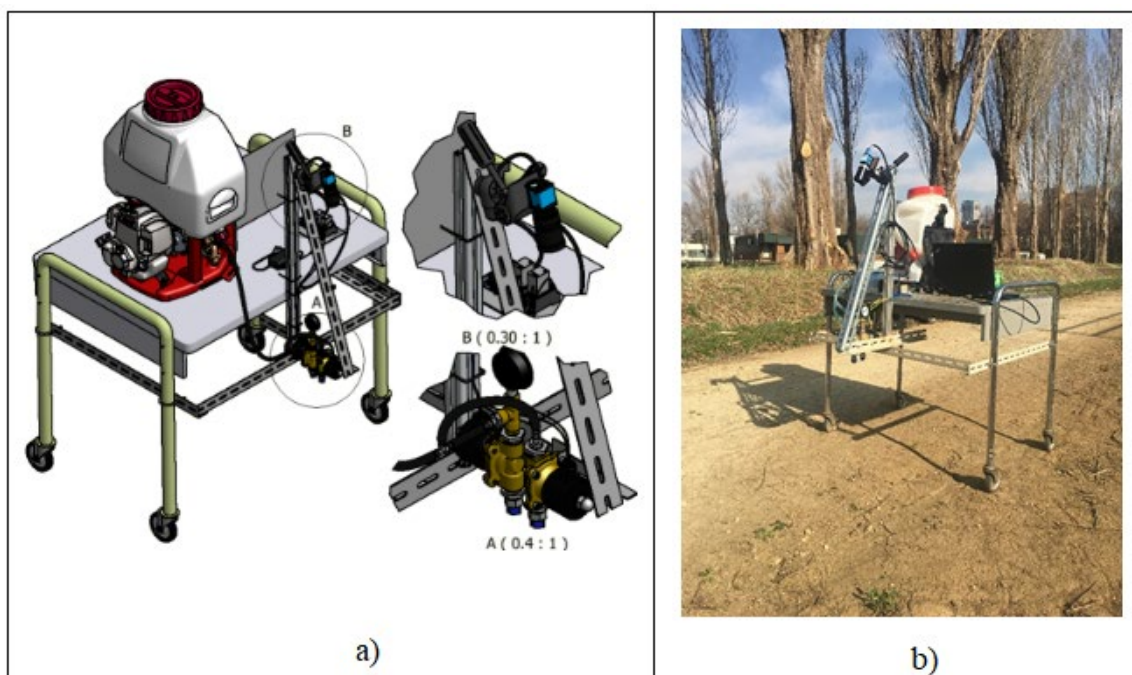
Sprayer prototype. a) Prototype on 3D design by Inventor software. b) Real prototype.
